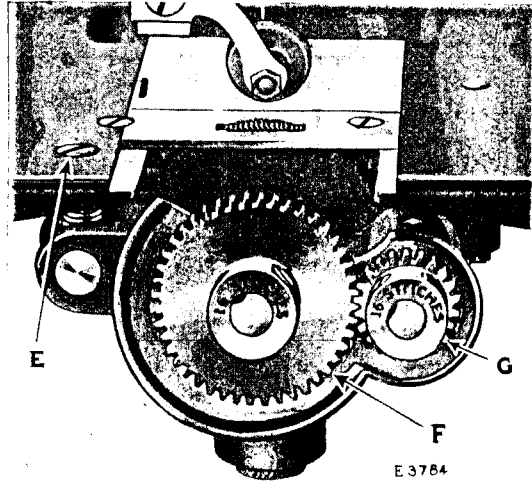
VIEW OF MACHINE, SHOWING STITCH REGULATING GEARS
